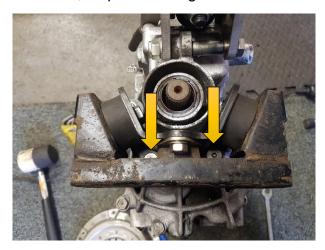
CROSSMEMBER MOUNTING BRACKET
